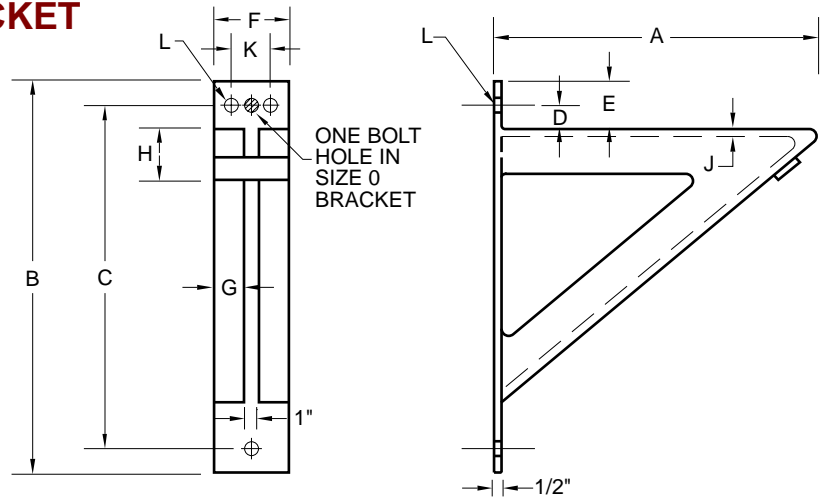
HEAVY WELDED STEEL BRACKET
